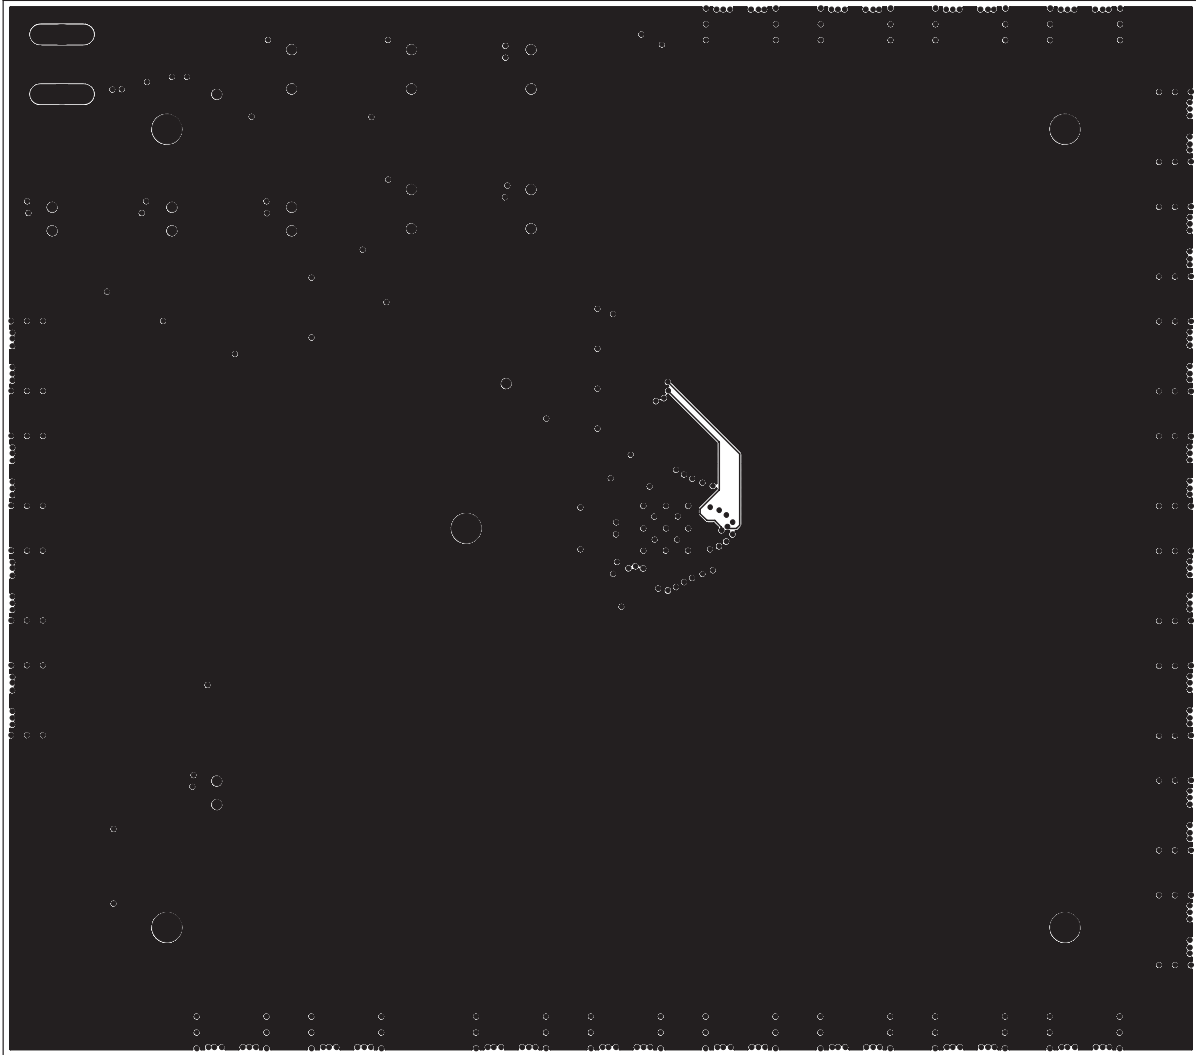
MAX3678 EV Kit PCB Layout—Power Plane
